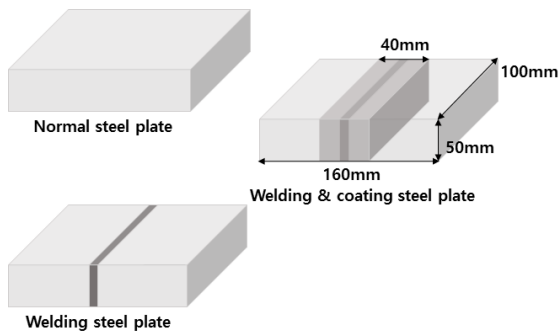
Geometry of normal, welding, welding & coating steel plates
